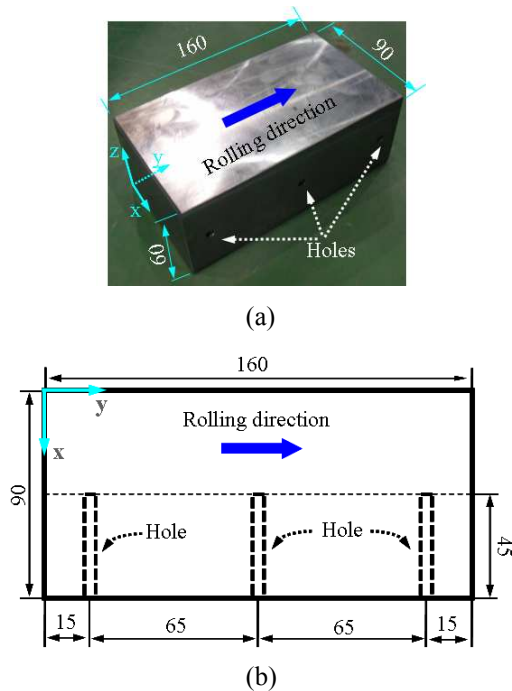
Dimensions of specimen for pilot rolling test: (a) complete view of specimen (b) top view of specimen
